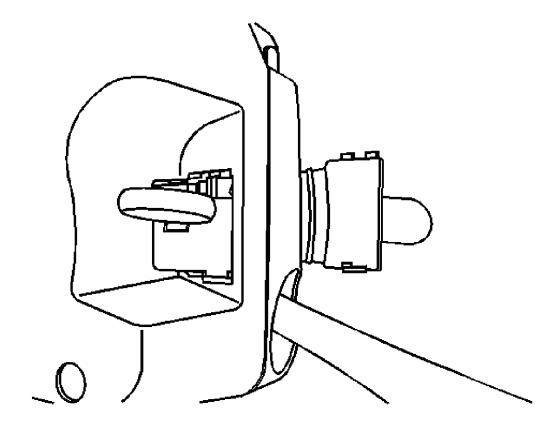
View Of Tilt Lever Close Out Plate Courtesy of GENERAL MOTORS CORP.
